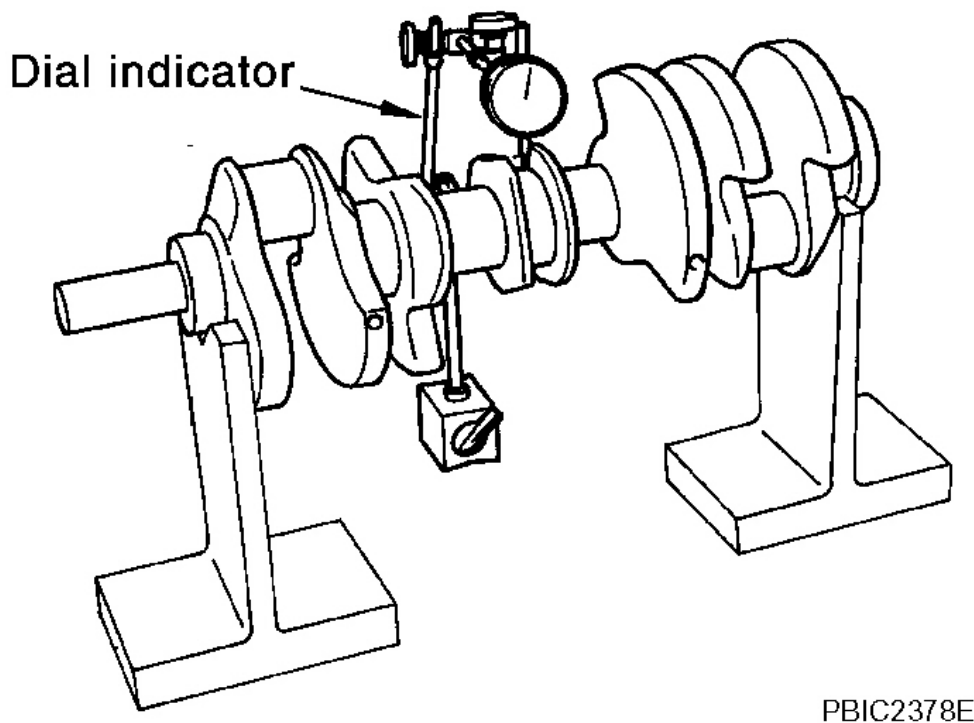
Placing Dial Indicator Straight Up On No. 3 Journal
